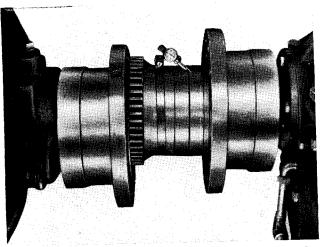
Checking Parallel Alignment with Dial Indicator on Outside Diameter of Hub
